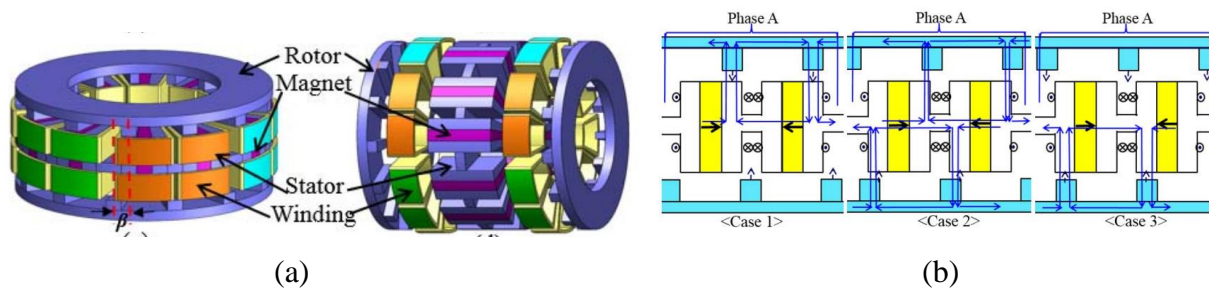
Axial field flux-switching permanent magnet machine with one stator and two rotors, (a) topology illustration, (b) principle of operation [228].
